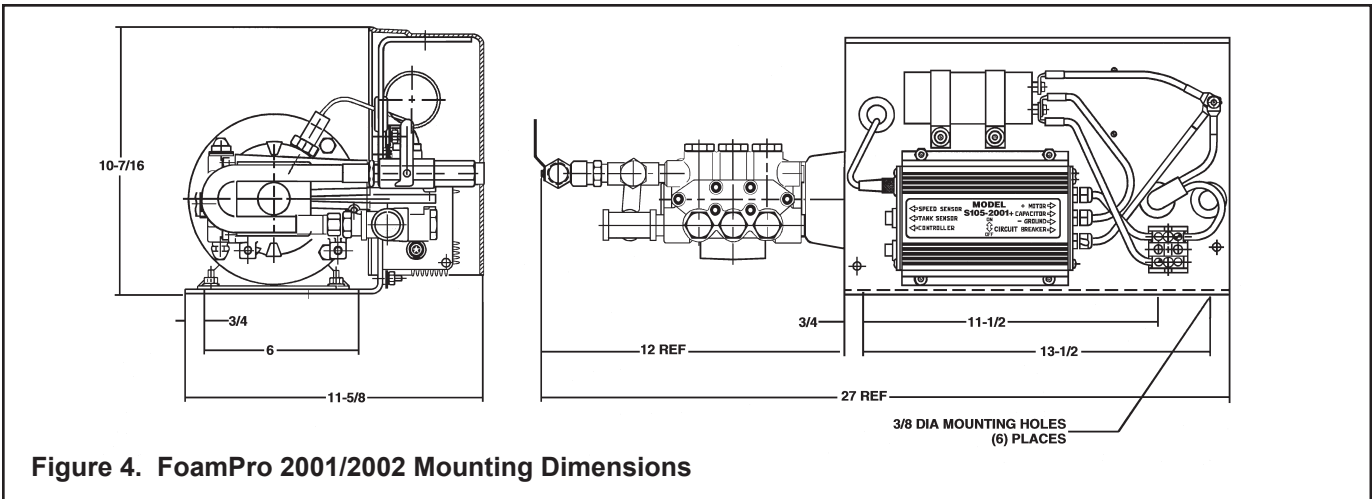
FoamPro 2001/2002 Mounting Dimensions
